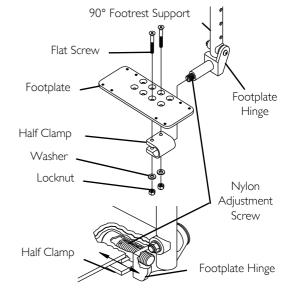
Installing Adjustable Angle Flip-up Footplates
